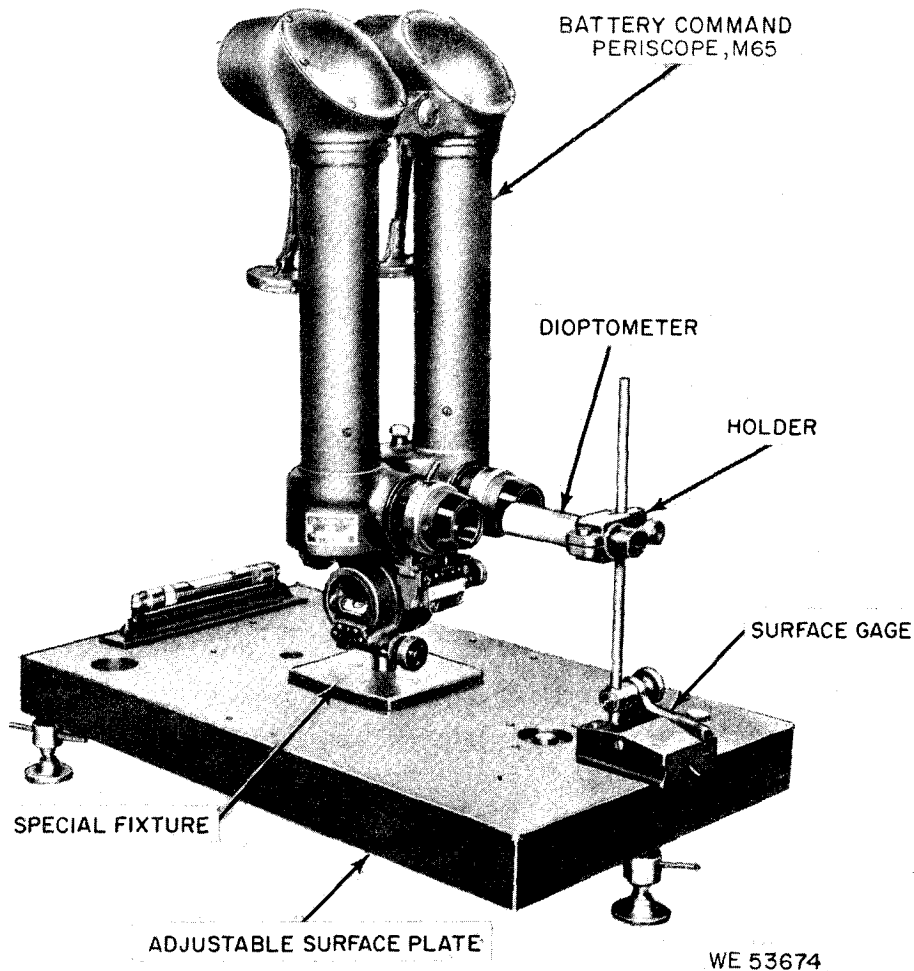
Fabricated special fixture and periscope mounted on adjustable surface plate and other tools.
